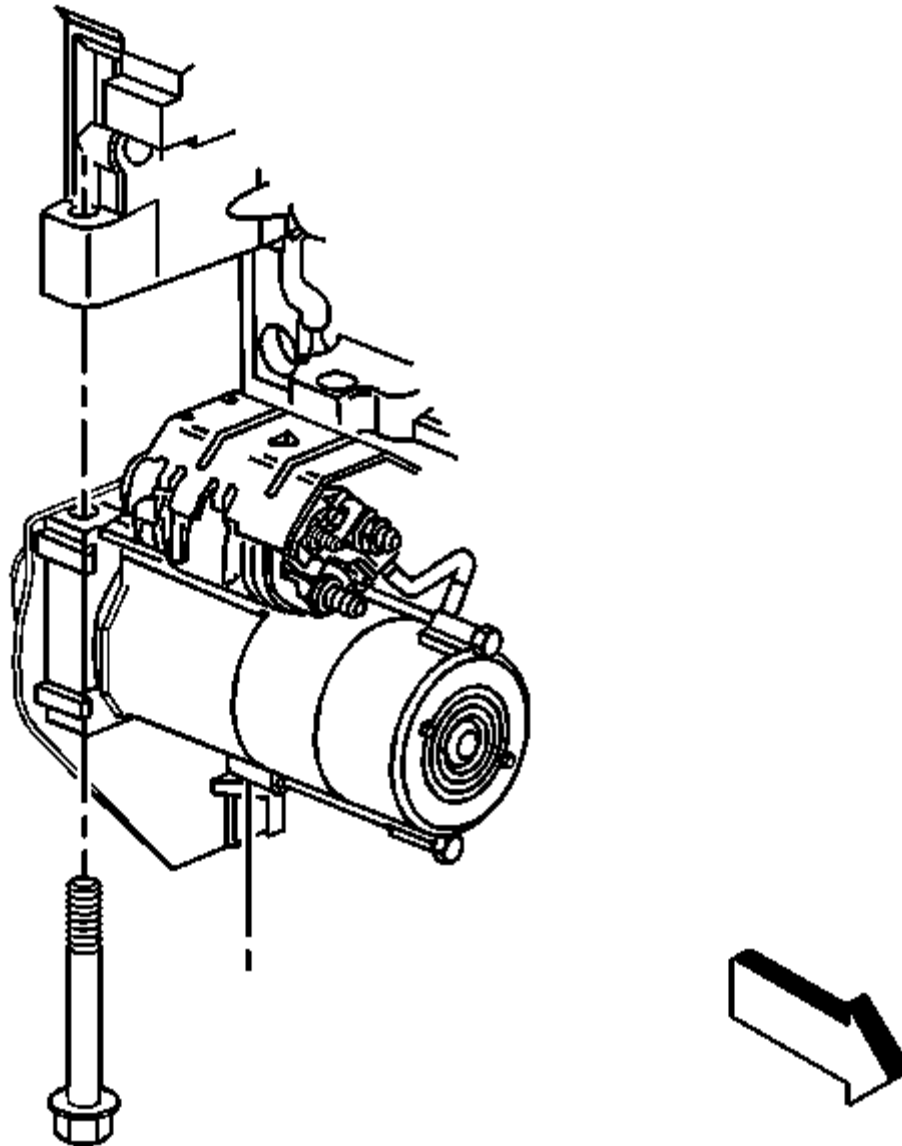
View Of Starter & Bolts (4.8L, 5.3L & 6.0L)
